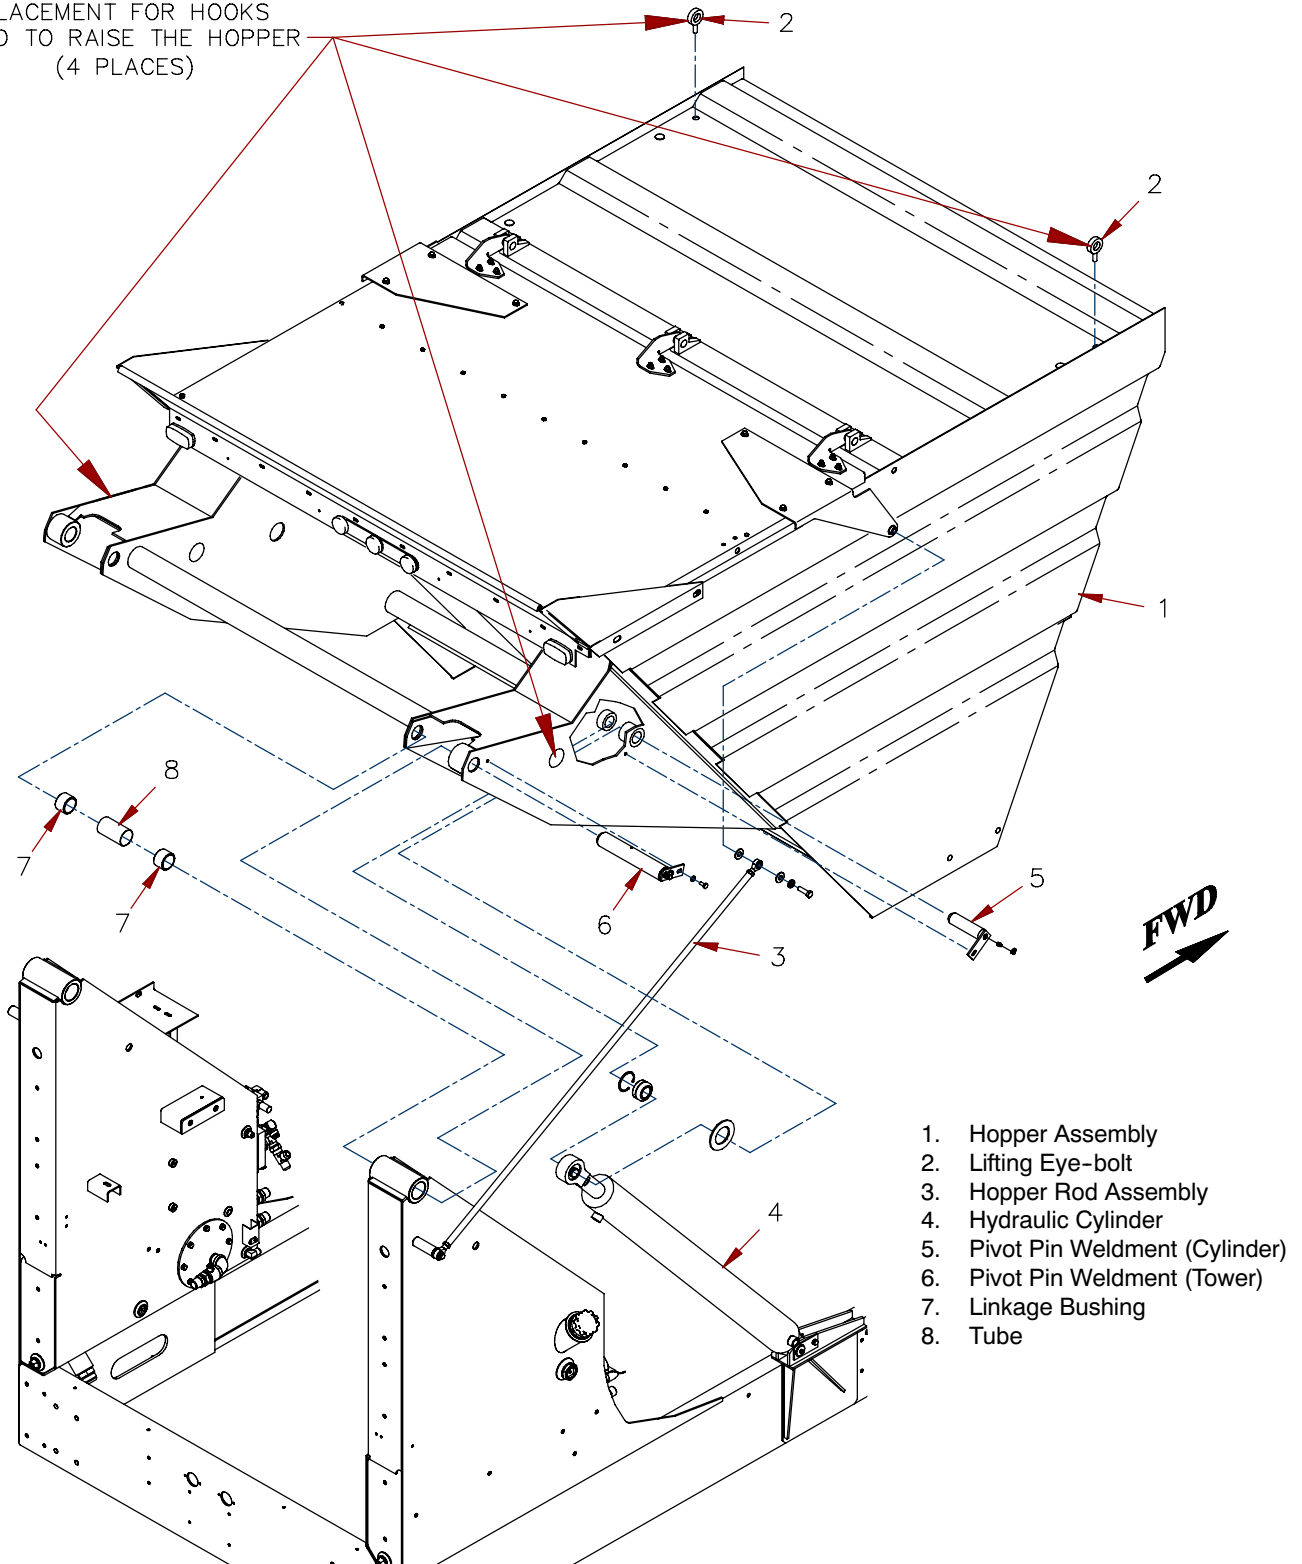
A To remove the hopper, attach an overhead crane sling to each of the attaching point.
